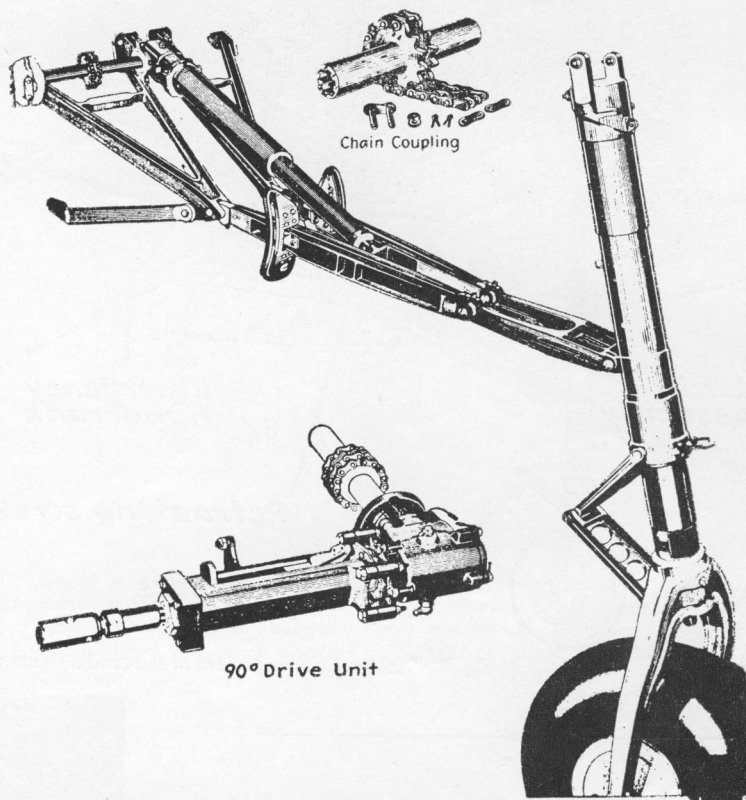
Component parts of the nose wheel gear assembly. The nose wheel retracts in unison with the main gear.
